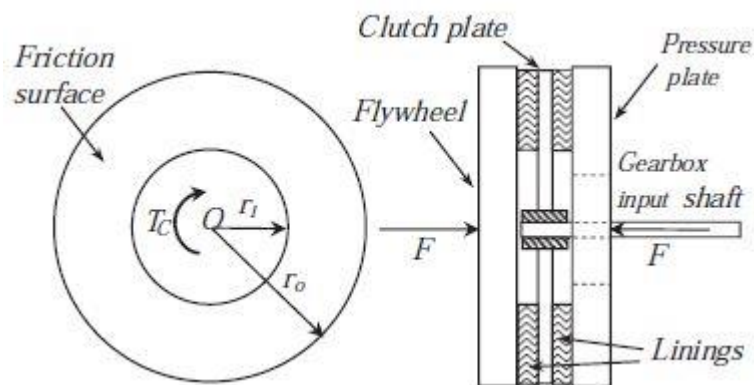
Friction surfaces of a clutch plate (Mashadi & Crolla, 2012)
